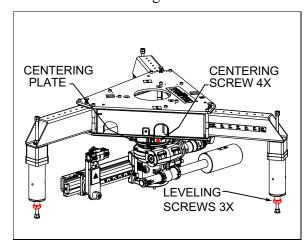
OD MOUNT ADJUSTMENT POINTS
